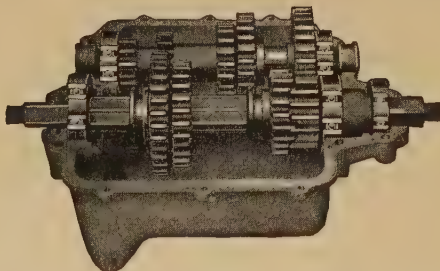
Gears in an automobile. The gear principle depends on the law of the lever. The acting force is applied at the circumference of the gear wheel. The larger the wheel, the longer is the force arm. (Courtesy, New Departure Mfg. Co.)
